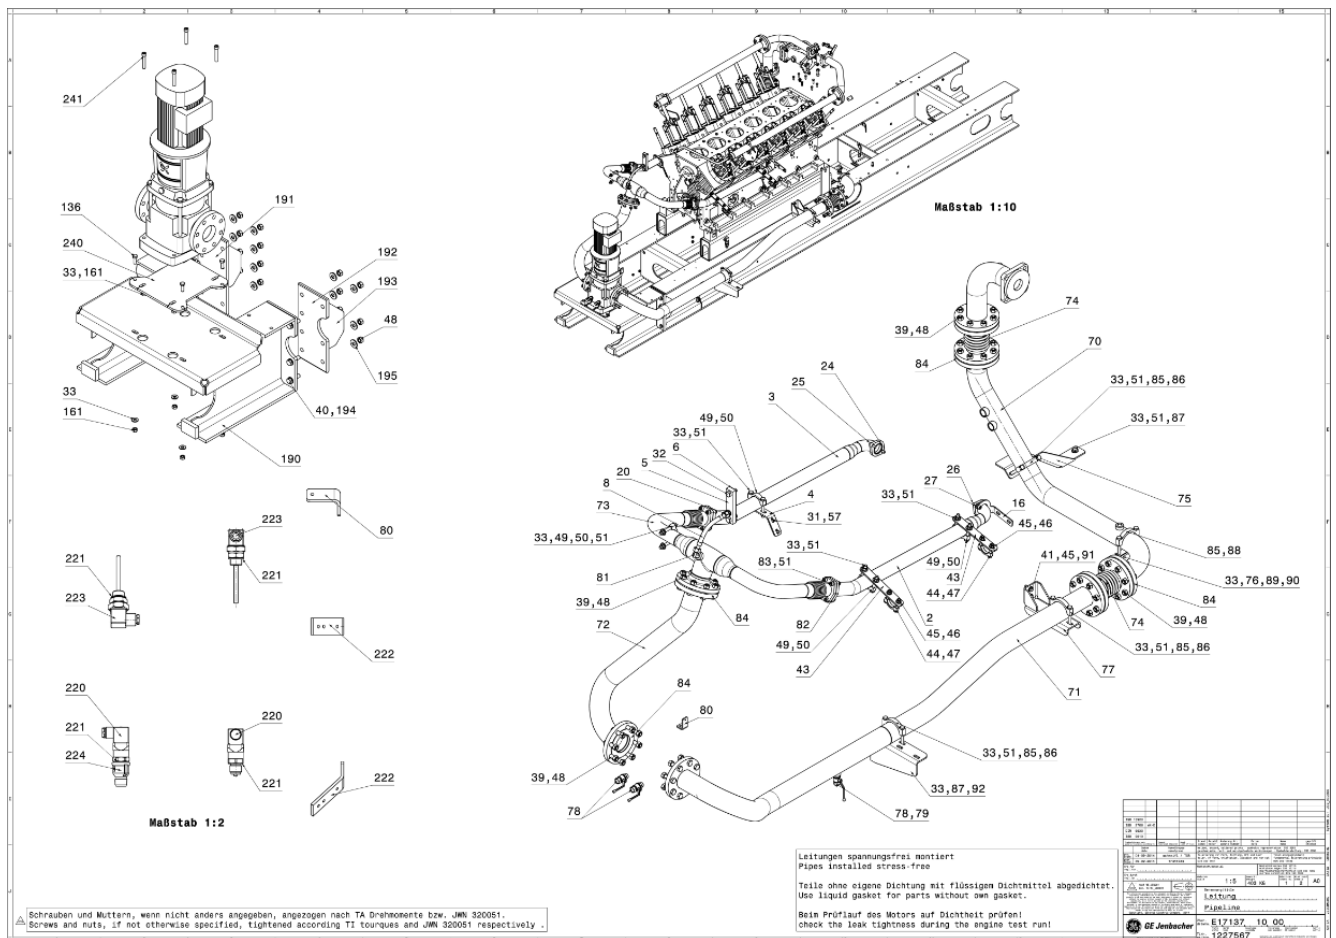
Drawing - electric engine cooling water pump with cooling water pipe and frame extension (1)
